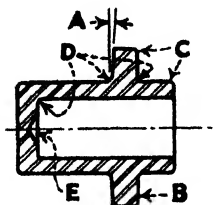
Sketch of flanged bushing. The angle A , which the rear face of the flange makes with a plane normal to the axis, is preferably not less than 3 deg. If face B must be square with axis, so indicate on drawing. If corners, as at C , must be broken to avoid burrs, so indicate on drawing. A small radius or chamfer, as at points D , helps to lower costs as does also allowance of a spot relief at E , as left by a standard drill used in boring the hole.
